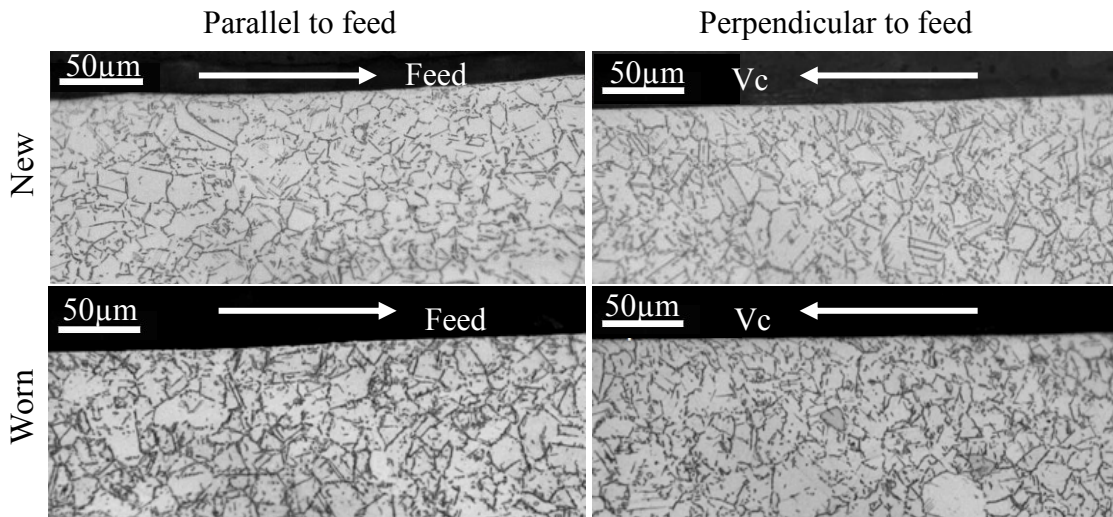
Cross sectional optical micrographs of machined workpiece of Test 5 following turning with new and worn inserts
